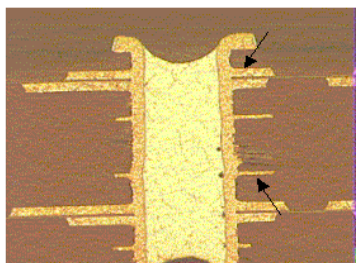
Cross Section of OEM Test Board Showing Two UTCEC Cores Separated by a Regular Core
